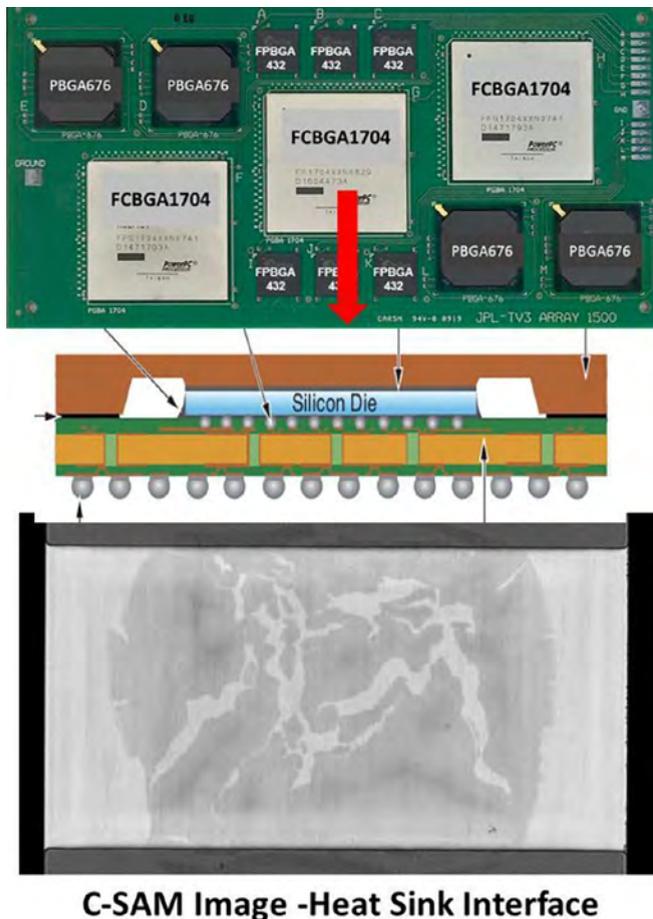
C-SAM layering images taken from the top to the internal LGA package assembly.
